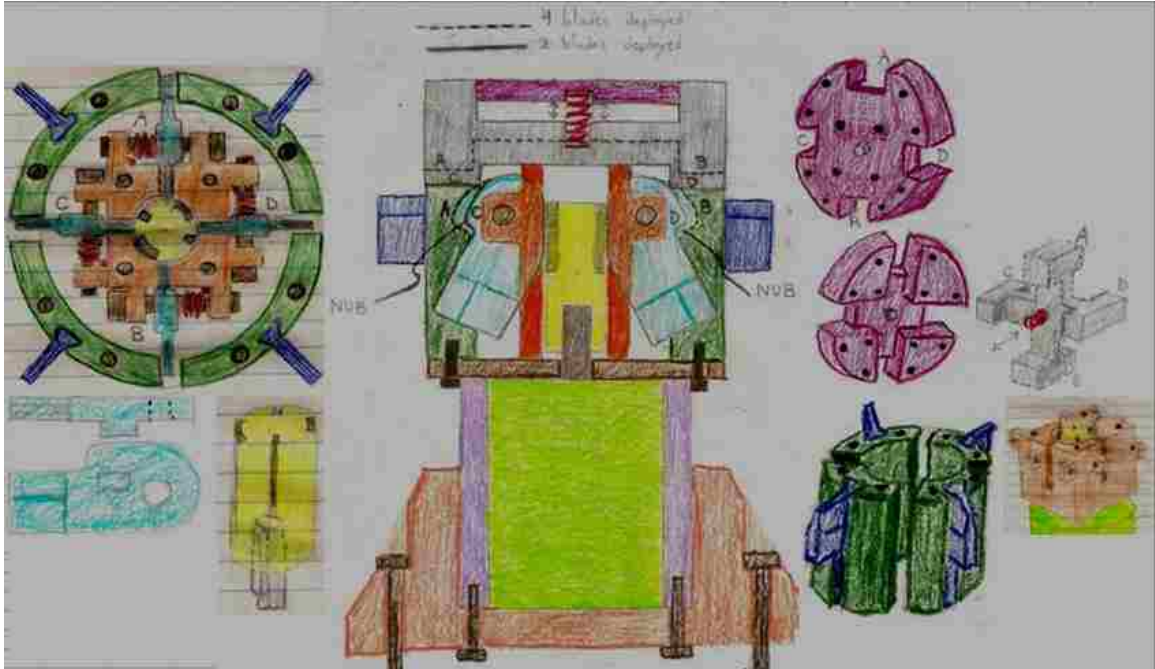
Original sketches showing the concept of an adaptive cutter with blades that pivot about bolt shafts like switchblade knives.
